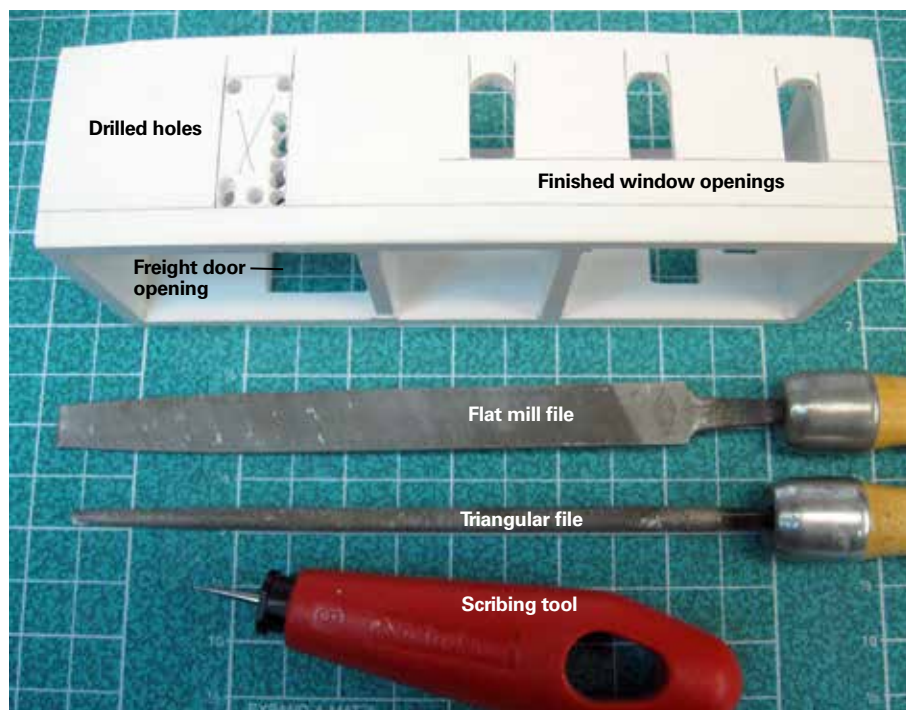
Wall openings. A rough door opening is shown partially drilled, while the other openings have been filed to fit the plastic window frames.
